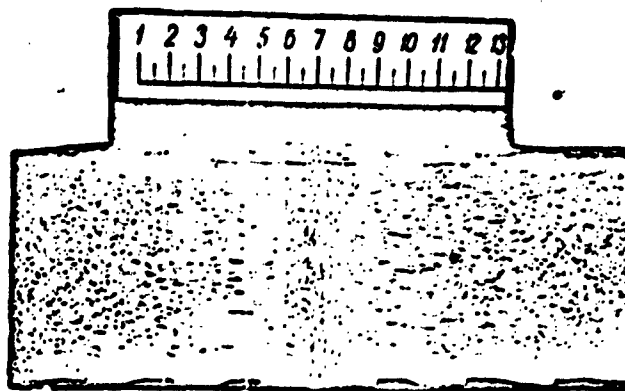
Macrostructure of joint produced by press welding at butt.
